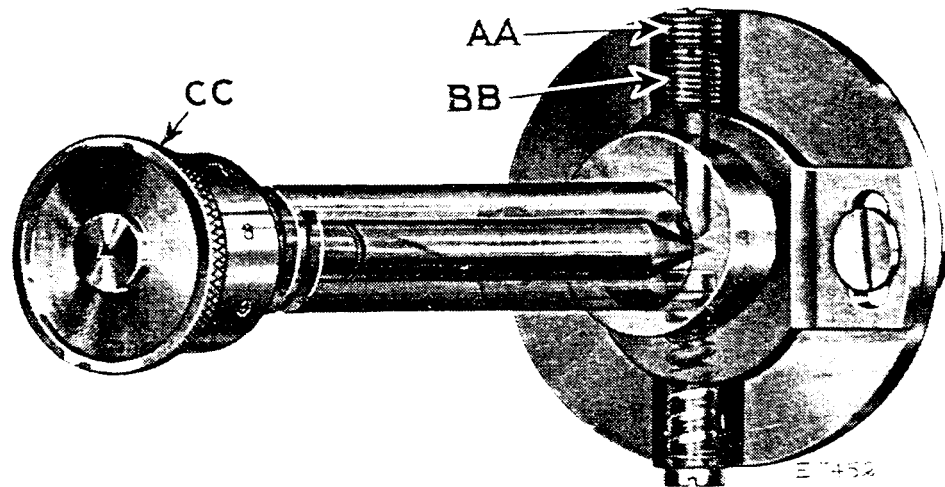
"X-Ray" View of Feed Driving Eccentric Regulating Bracket and Shaft, showing the Feed Regulating Spindle and Adjusting Screw (BB) which comes in contact with the Cone of the Spindle to gauge the length of stitch.
